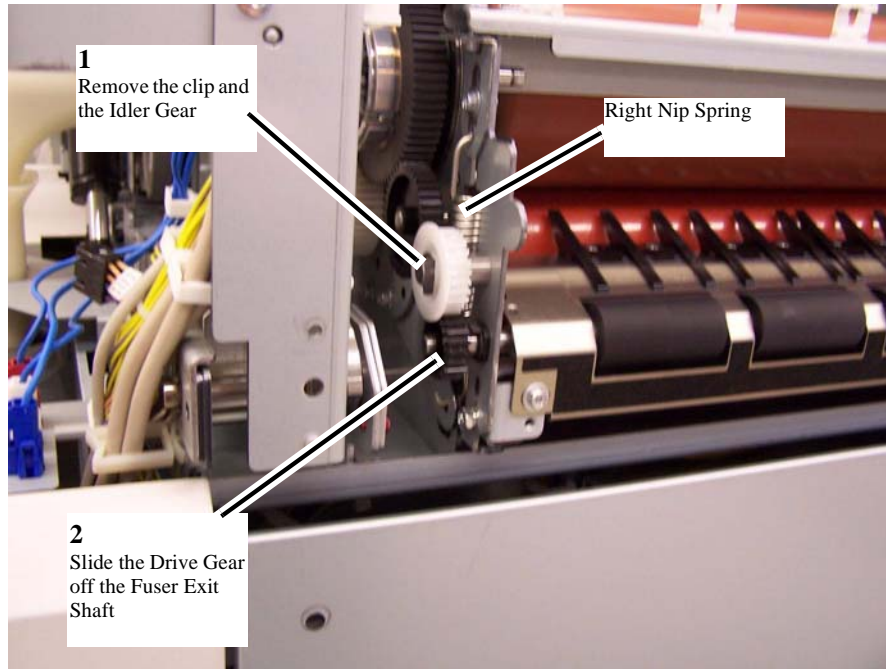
Remove the gears at the right end of the Fuser Exit Shaft
